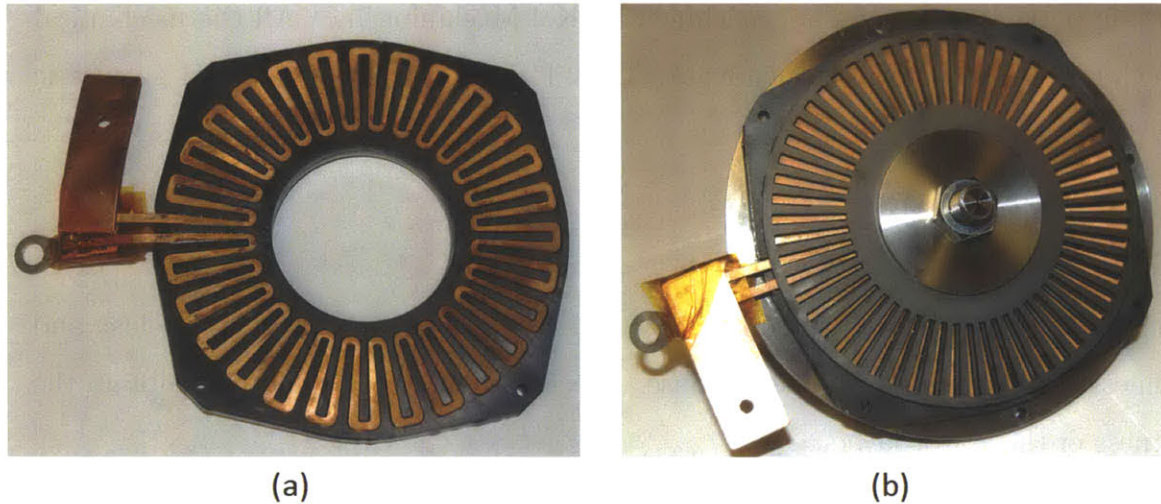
Assembled (a) stator piece (b) stator & rotor piece.
